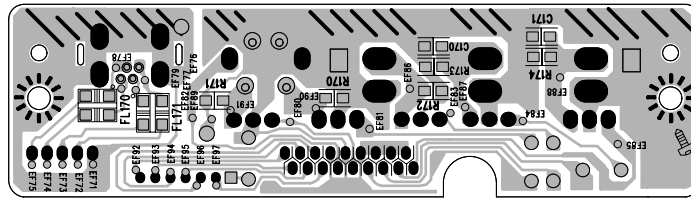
EU55 Front Jack PC Broad (Bottom side)
